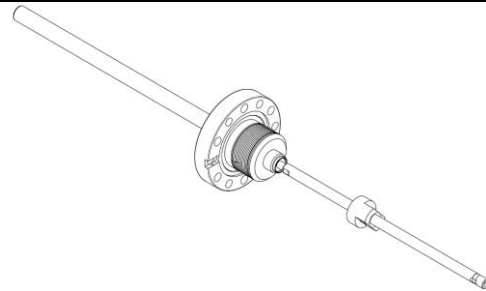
Remove the shaft carefully: Avoid tilting the shaft axis. Tilting may damage the inner magnet assembly.
